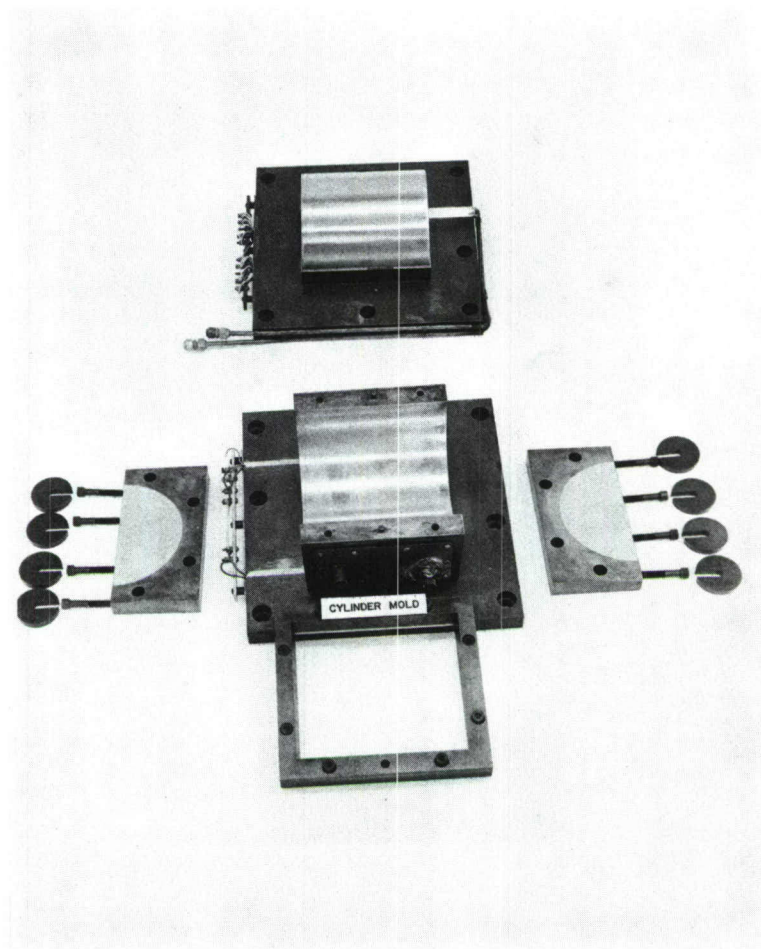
The RE5204 Cylindrical Section Mold Disassembled to Show Its Component Parts.
